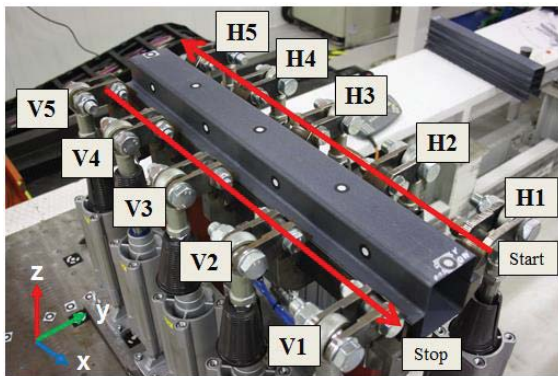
Welding fixture with beam, welding directions, measurement points and clamping
